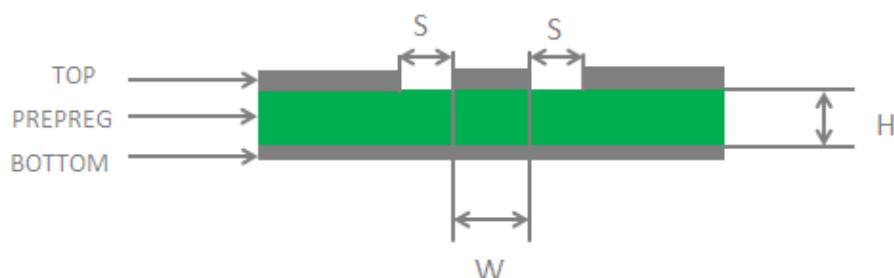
Coplanar Waveguide Design on a 2-layer PCB
